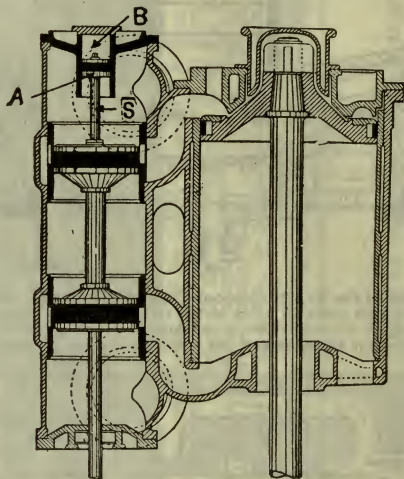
Balancing cylinder (B), for balancing the weight of large heavy valves.
